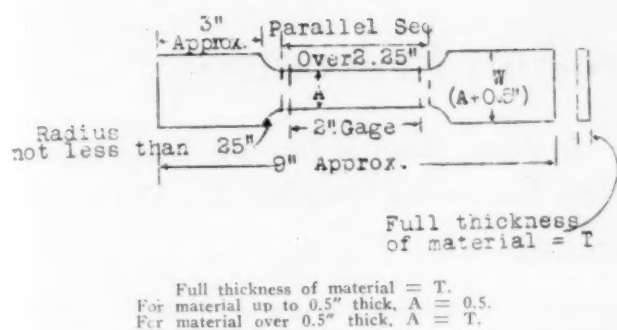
STANDARD FLAT TENSION TEST SPECIMEN
